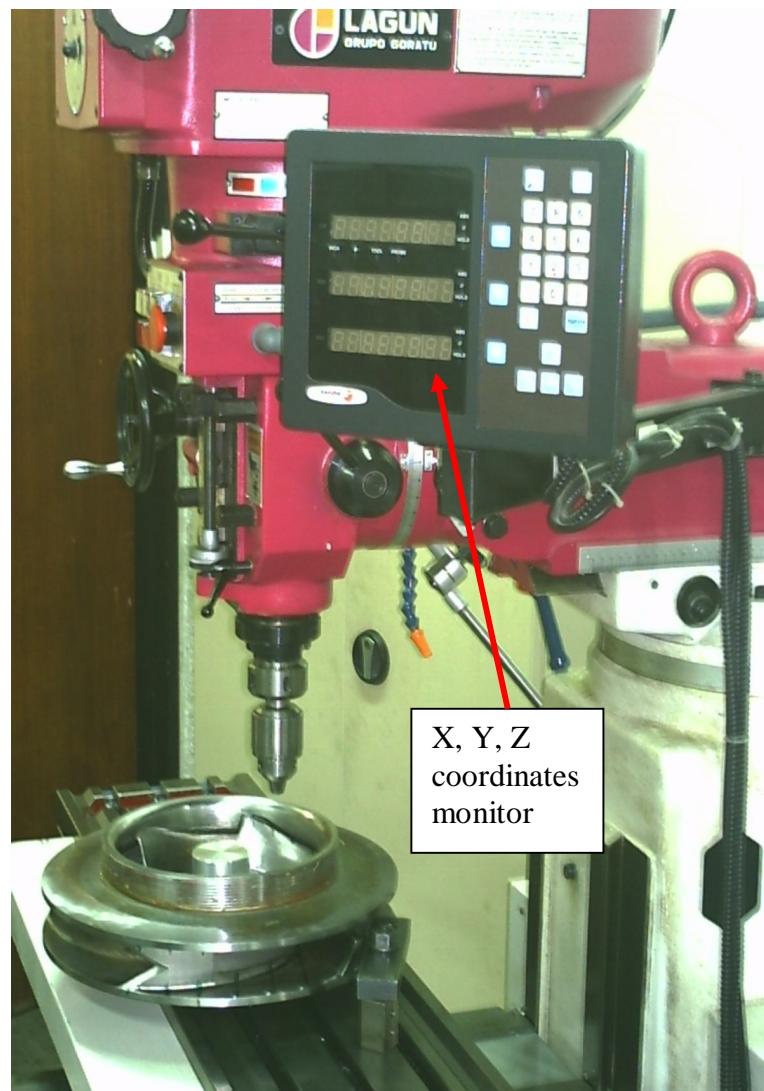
Geometrical data collection of BFP impeller using milling machine
